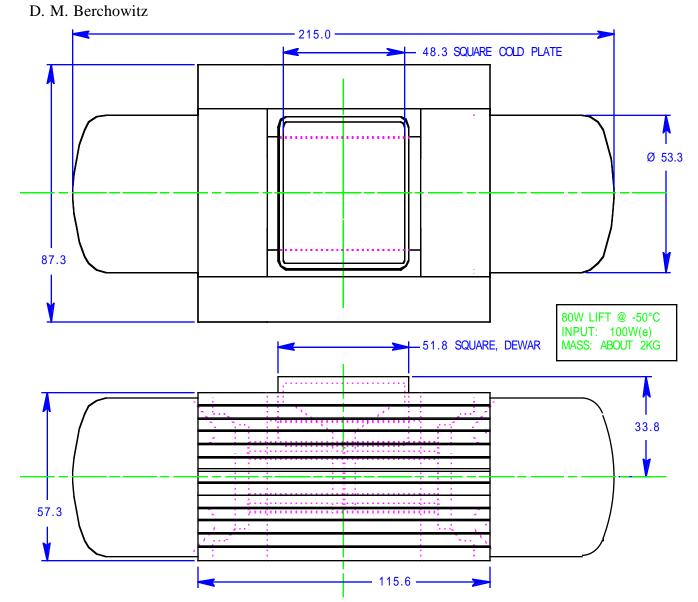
Miniature free-piston Stirling cooler capable of lifting 80W at -50° C with 100W input (dimensions in mm).
